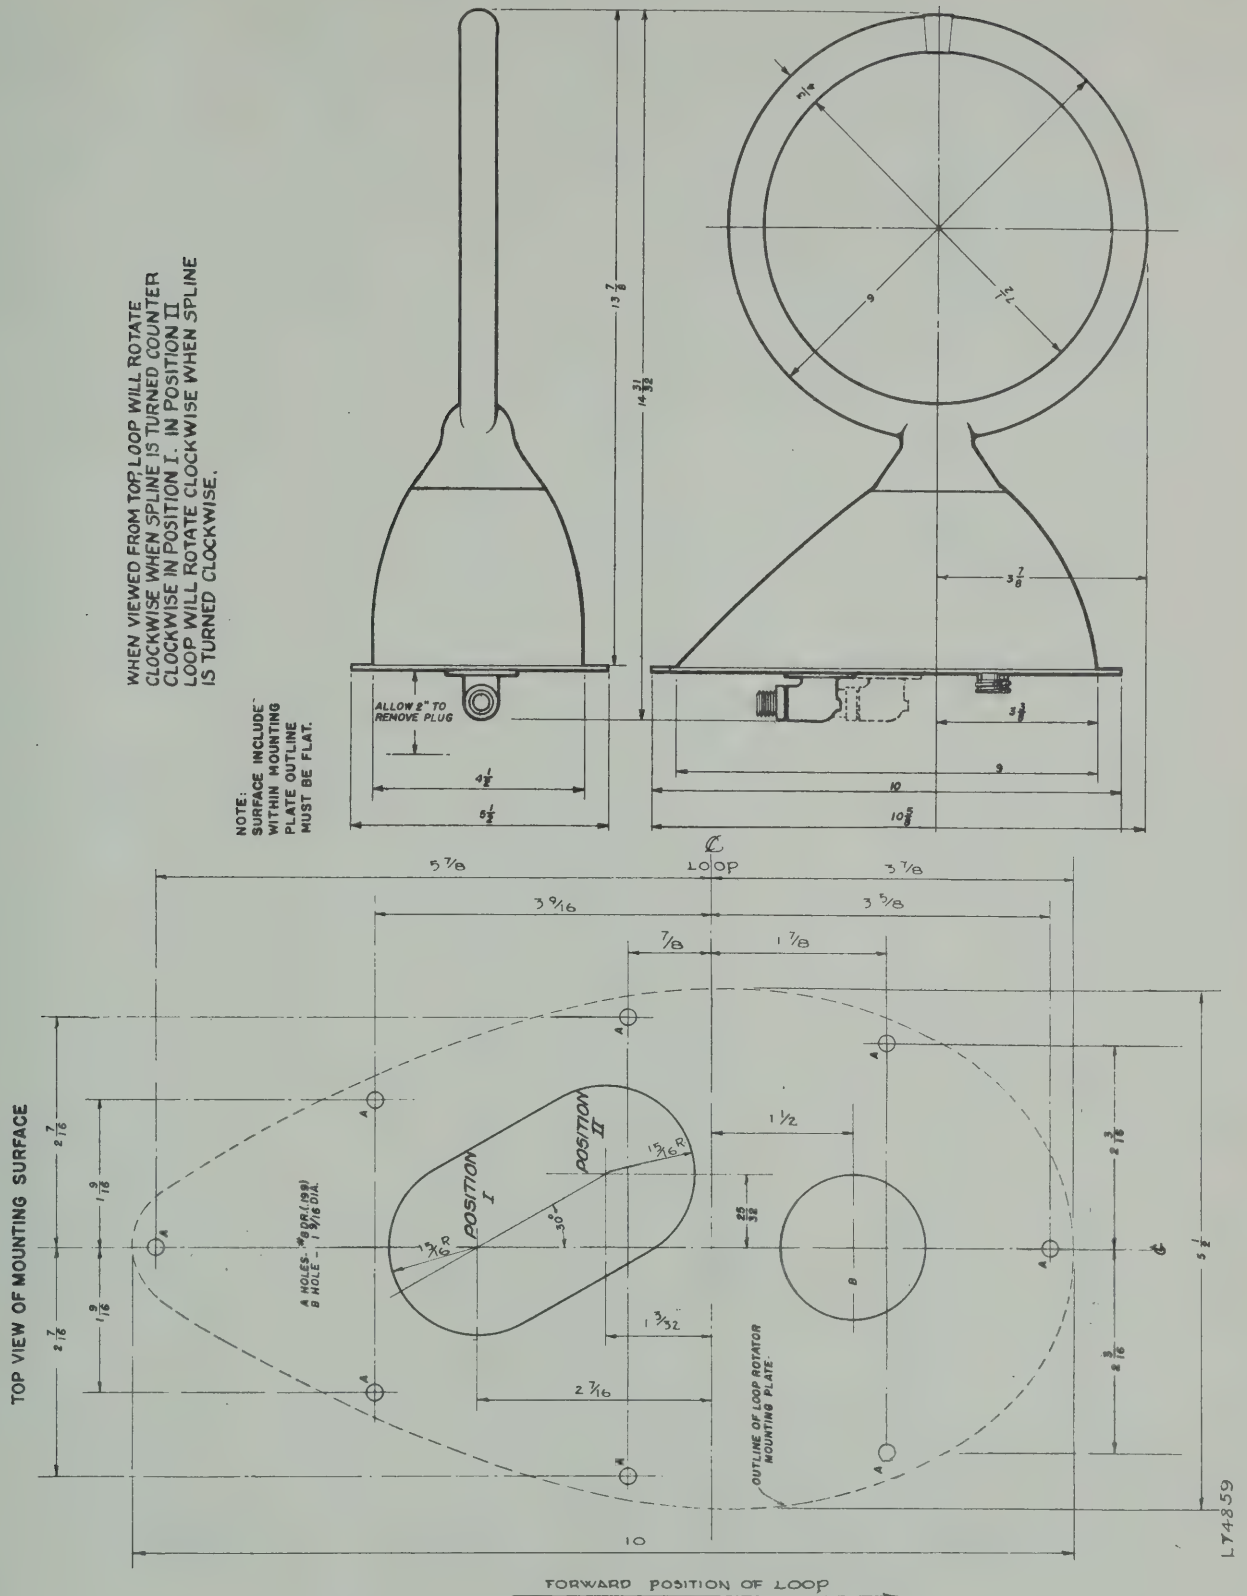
TYPE MN-20 ROTATABLE LOOP, OUTLINE AND MOUNTING DIMENSIONS
